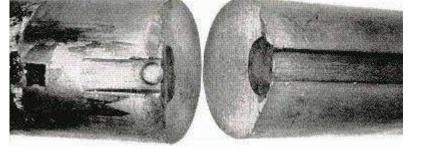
failure of keyed shaft due to fatigue crack (heat treated steel C45)
